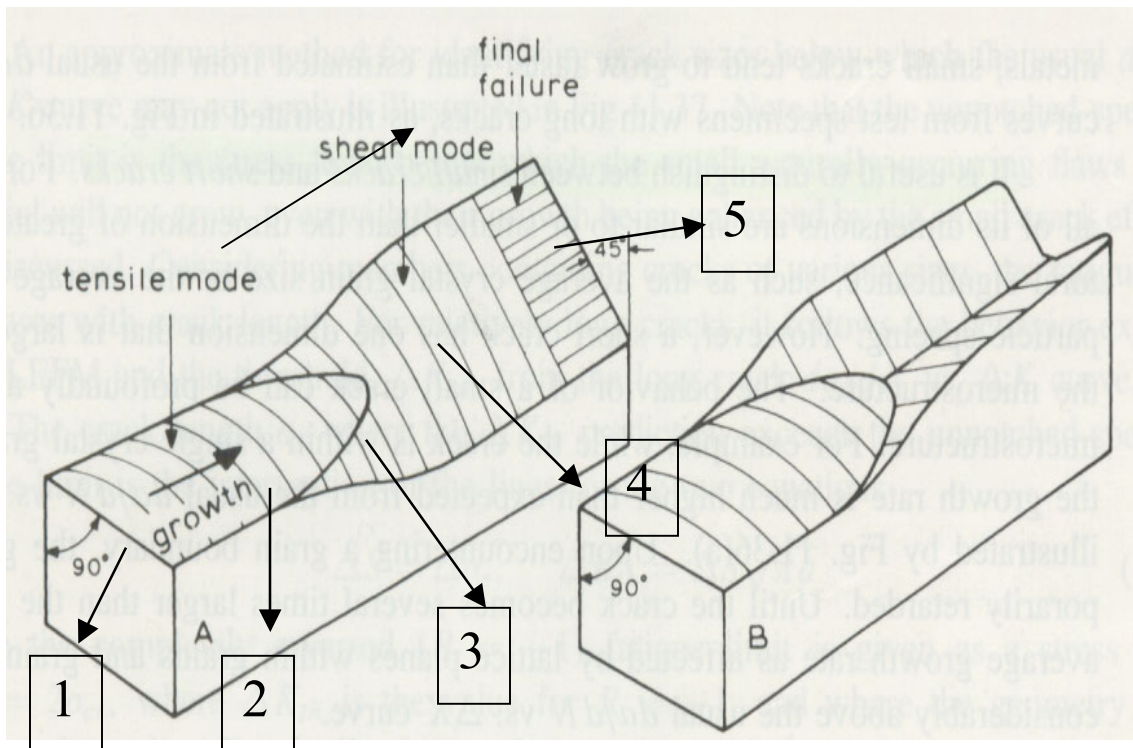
Schematic of fatigue crack surfaces showing transition from a flat tensile mode to an angular shear mode. The shear growth (A) occurs on a single sloping surface, or (B) forms a V-shape. (Dowling, 1993)
